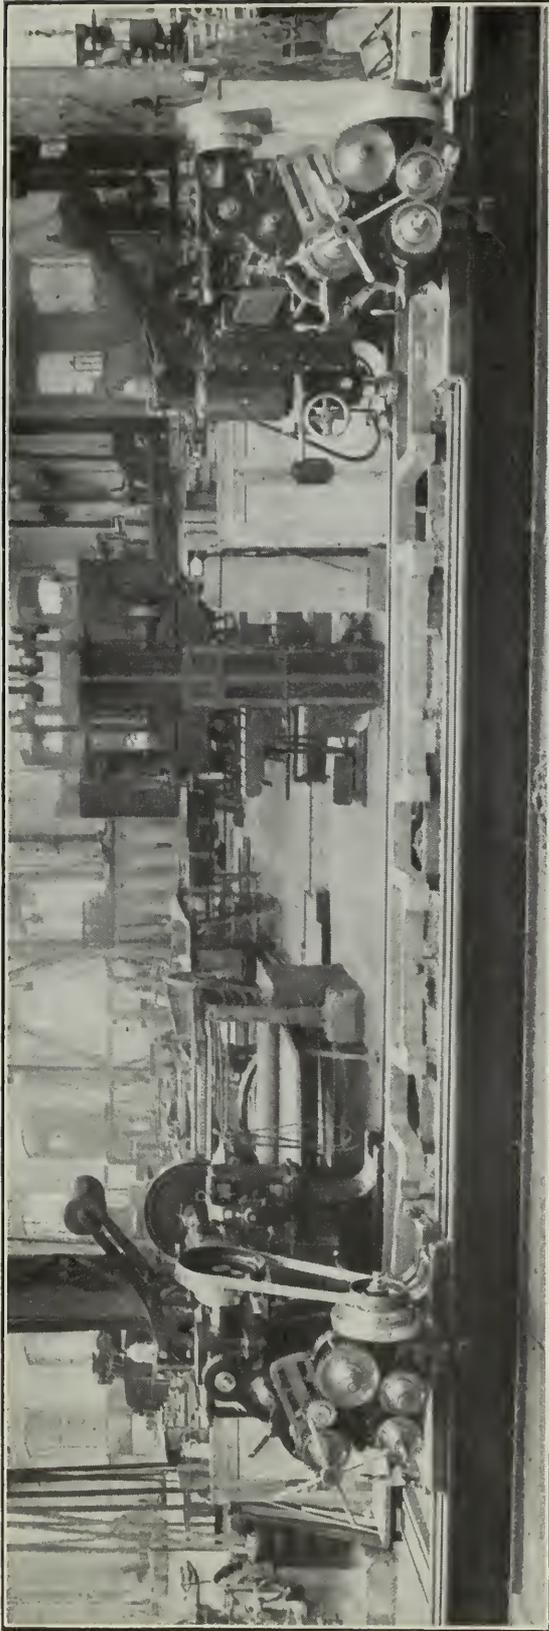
A. SPECIAL MILLING MACHINE AT WORK ON PACIFIC-TYPE ENGINE FRAMES.
